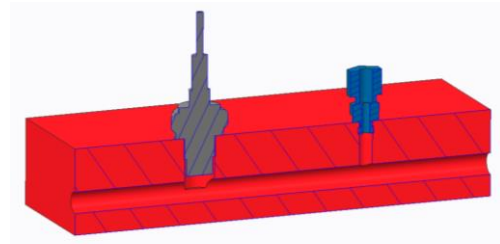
Section view of a design iteration B partial assembly. The section view of the assembly clearly shows the internal fluid path used for functional testing. The B1 iteration design (red) is pictured with a TE Connectivity PT (gray) and a Beswick fitting used to mount the Memscap PT (blue). The Memscap PT and both COTS fittings are not included in this assembly.
